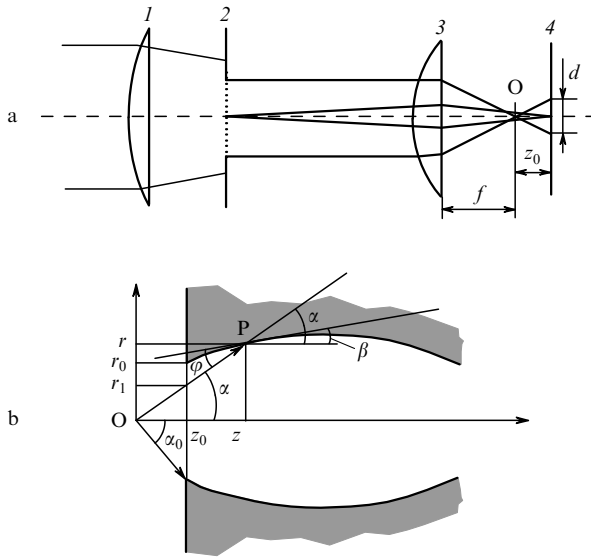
(a) Optical scheme for drilling holes by using a projection scheme [(1) condenser lens; (2) molybdenum mask; (3) projecting lens; (4) material surface] and (b) one of the rays OP of the incident beam inside the hole. All the angles are strongly enlarged for clearness.
